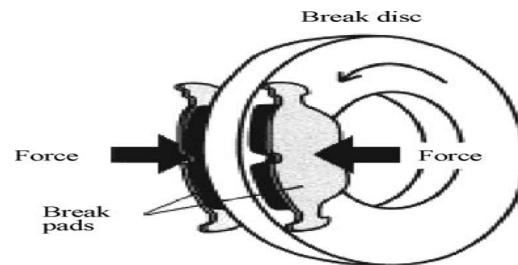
Schematic view of real size brake system (brake disc and brake pad)
